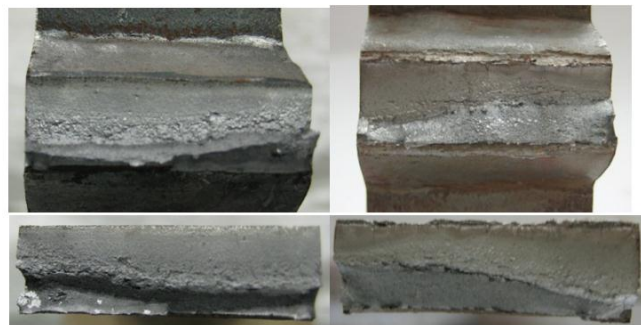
Fractured surface of Specimen A6 (left) & Specimen F6 (right)
